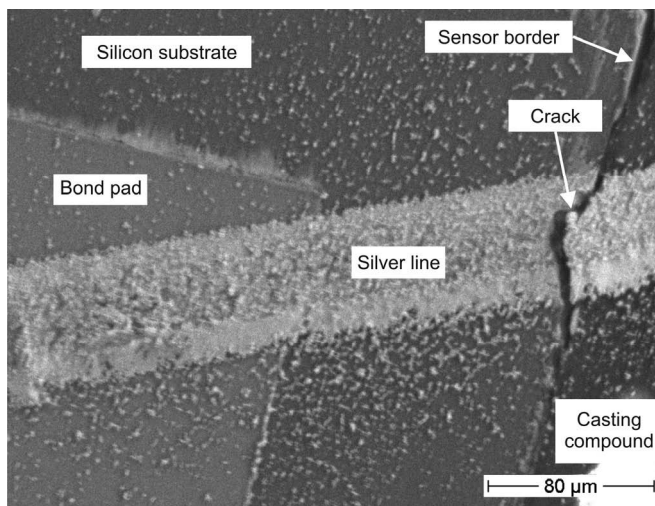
SEM picture of a crack in a printed silver line between thermal flow sensor and casting compound after sintering.
